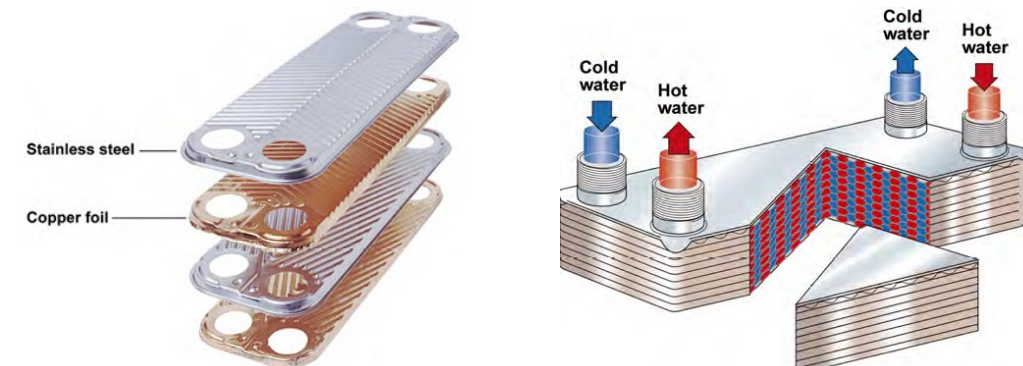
Copper brazed plate heat exchanger (BHE) consisting of stainless steel plates and copper brazed in a vacuum furnace.
